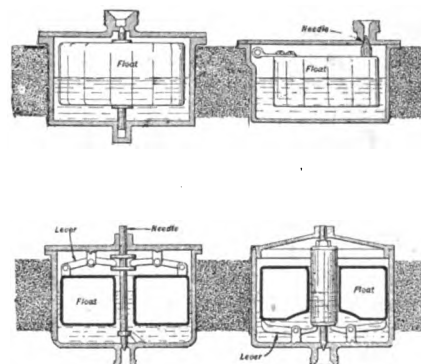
SHOWS THE WORKING PARTS OF THE CARBURETOR
